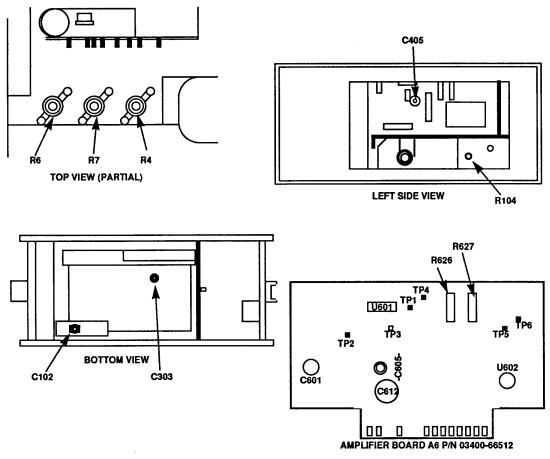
Test instrument - top, left side, bottom view, and A6 board, P/N 03400-66512.
